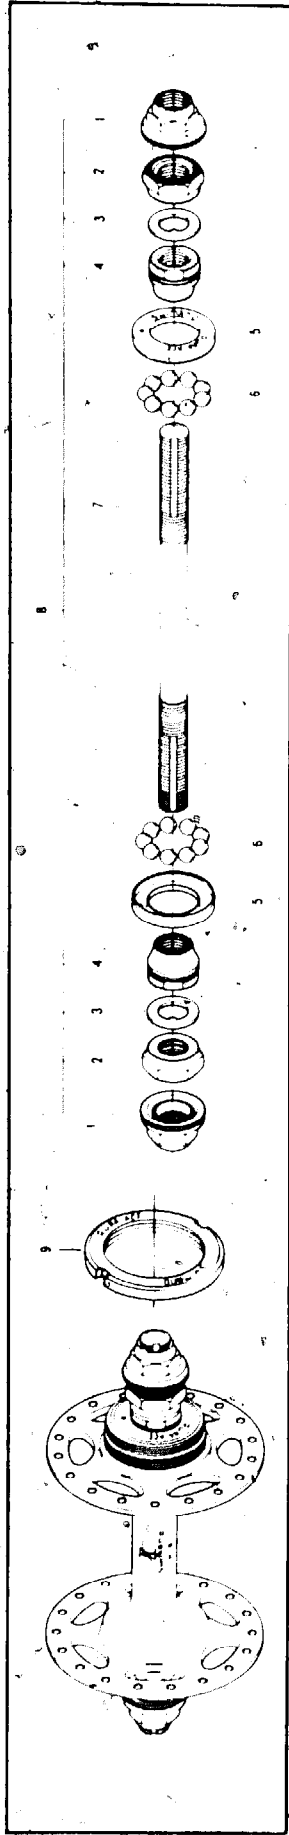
Shimano Model HA-300 rear track hub. Parts are: (1) track nut, (2) lock nut, (3) non-turn washer, (4) cone, (5) dust cap, (6) steel ball, (7) axle, (8) complete axle set and (9) lock ring.
